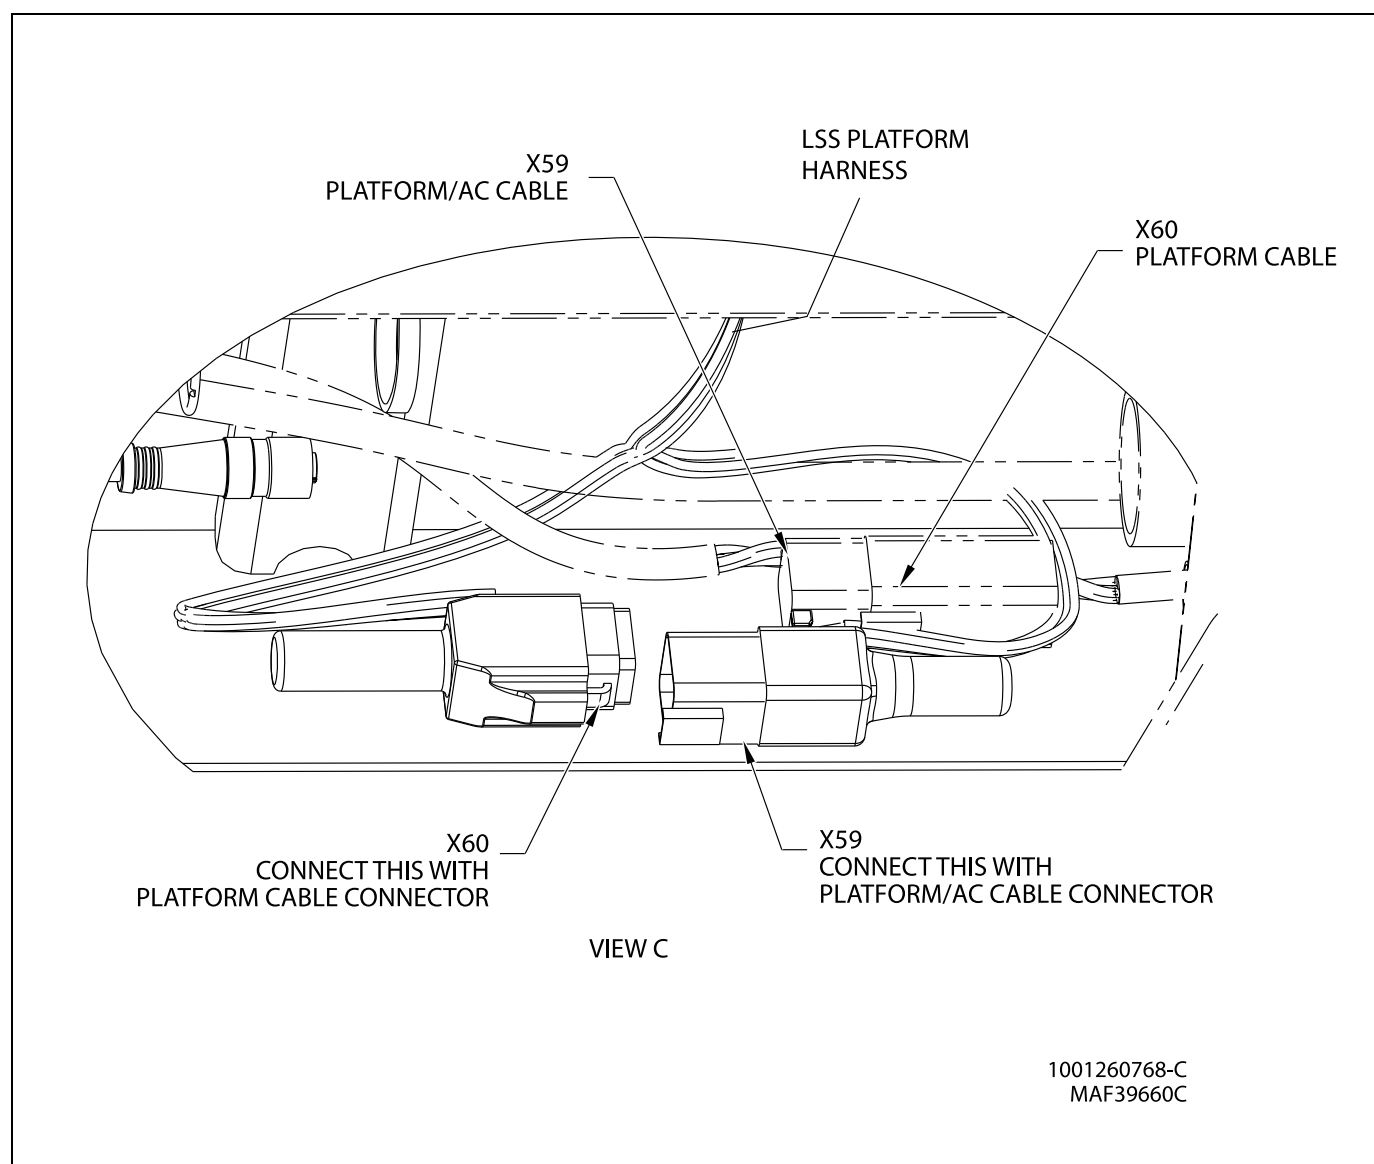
LSS and Platform Assembly - Installation/Removal - Sheet 4 of 4
